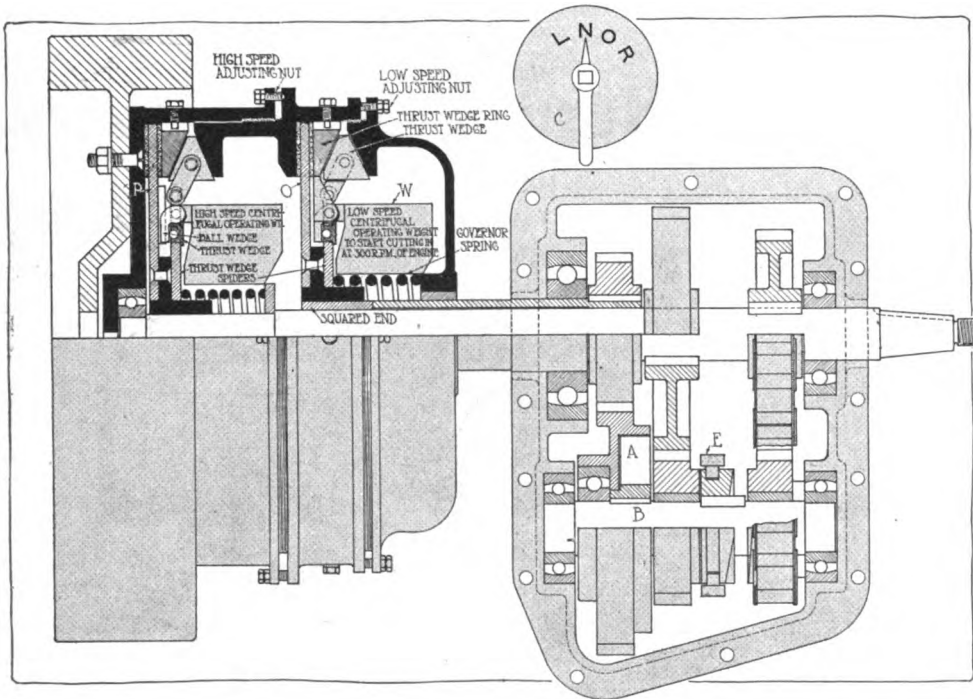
Sectional view showing operating mechanism of the Zeitler automatic gearbox
